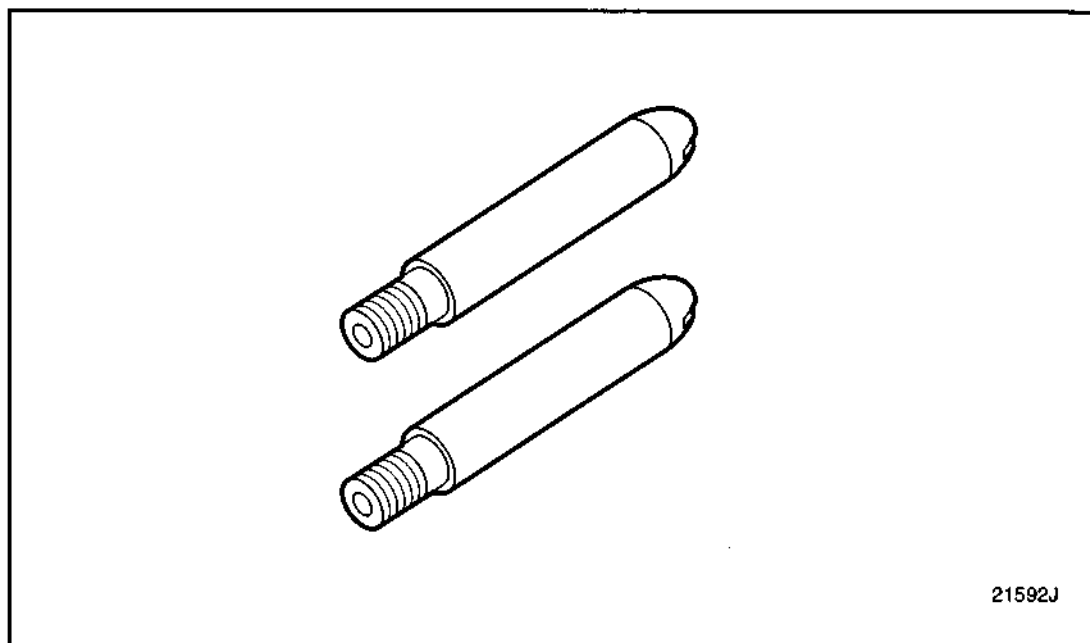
Bull/Cam Idler Gear Guide Studs,J 35785
